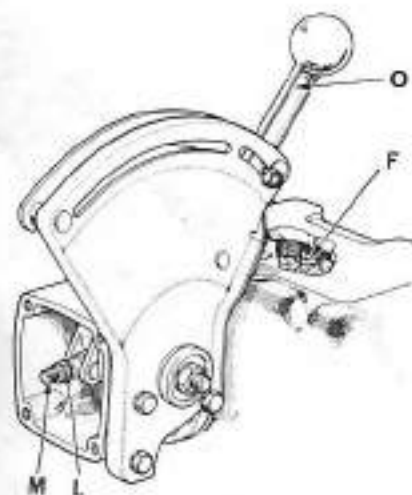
Adjusting points for connecting rod nut (L); refer to text for adjusting procedure.
